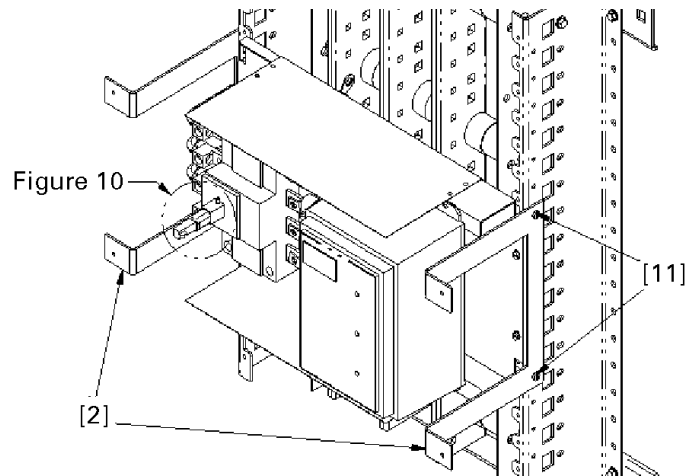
Filler supports for 36, 40, and 44 wide panelboard or 40 and 45 wide switchboard.
